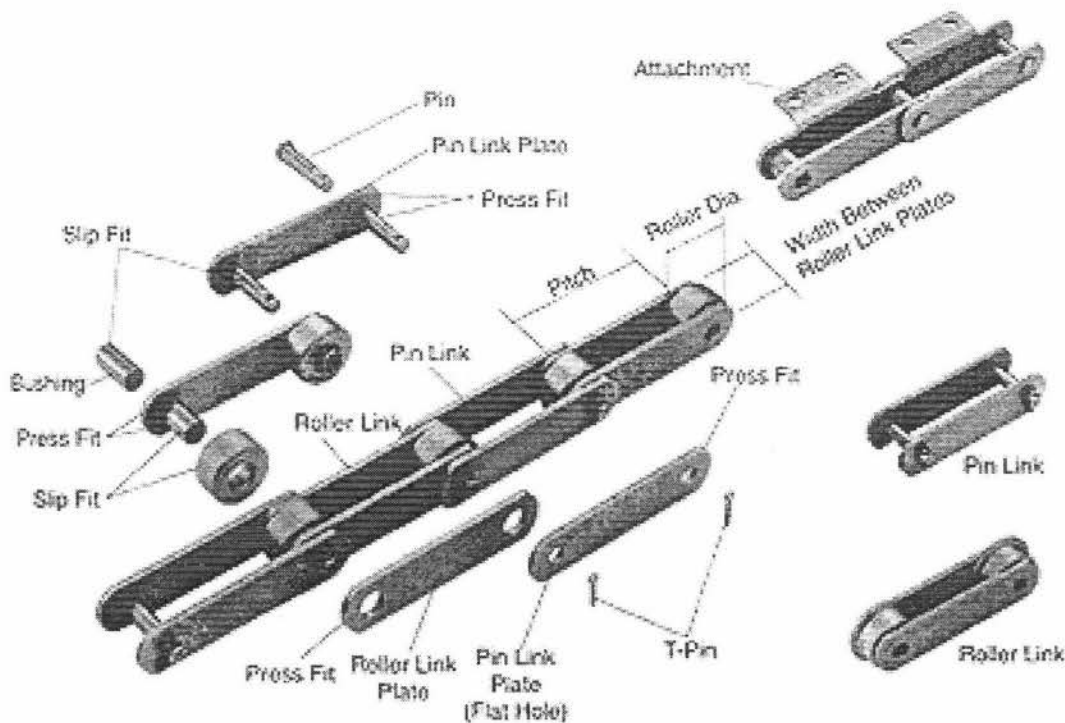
Exploded view of a conveyor chain from US Tsubaki.
